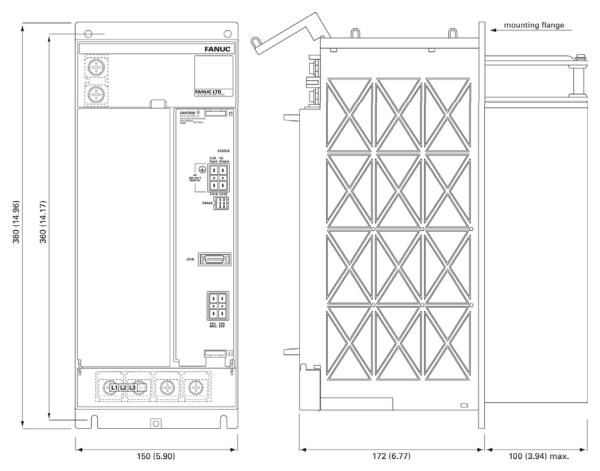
Power Supply Modules PSM-30HVi and PSM-45 HVi Outline Drawing
